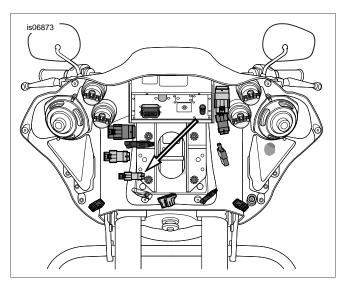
Twist Grip Sensor Jumper Harness Connector (FLTR models)
